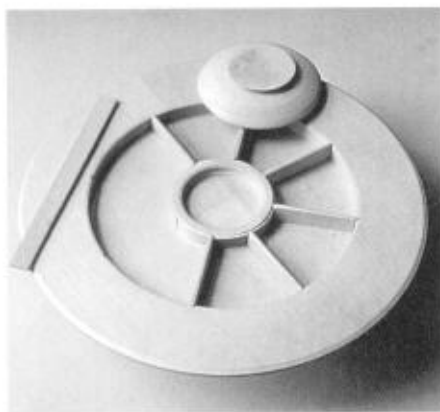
With the board mounted on an expanding chuck, a circular trench was cut and the screw holes from the faceplate mounting eliminated.
